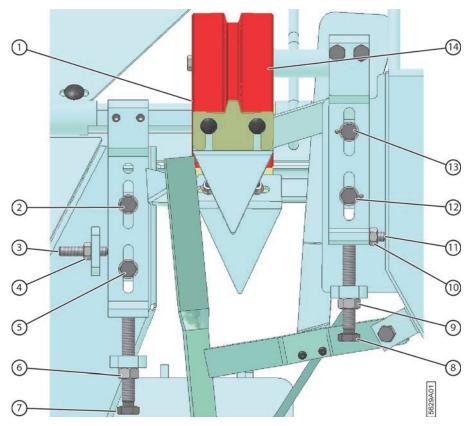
Adjusting tension of the uppermost outermost picking belt
